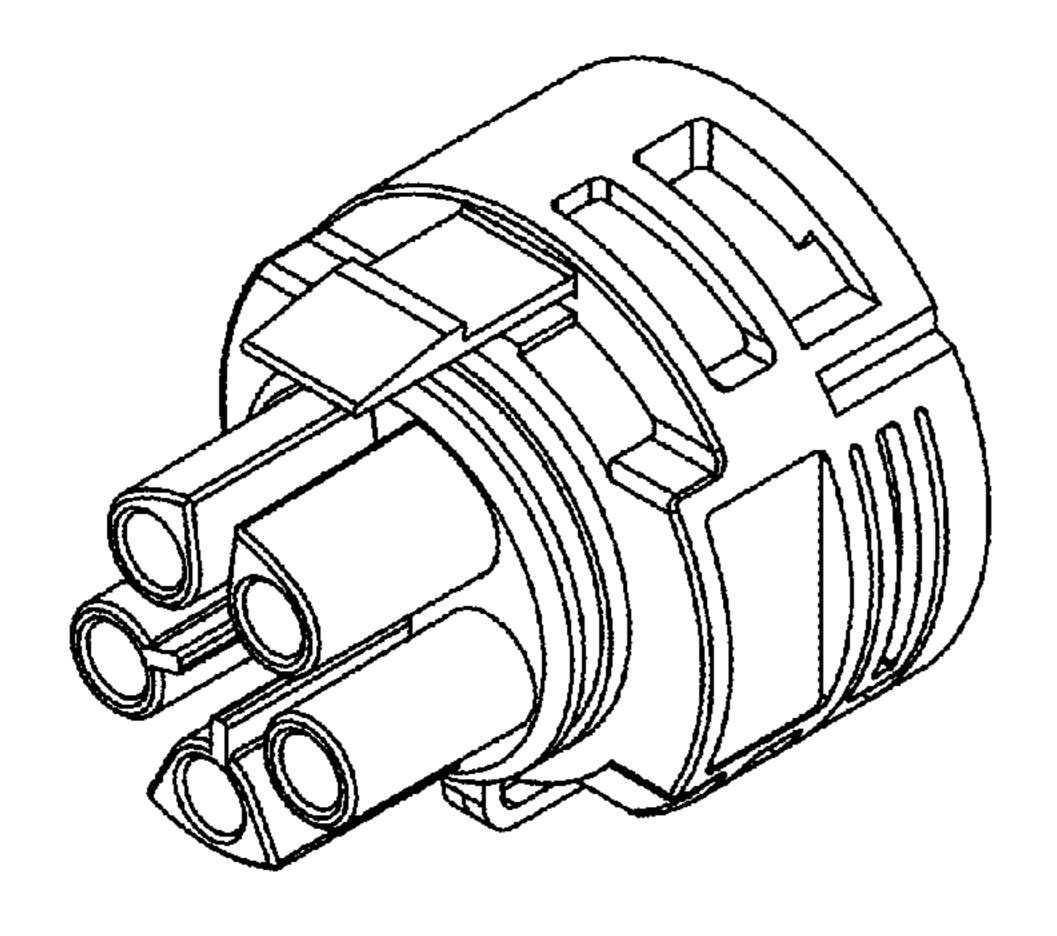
is a front perspective view of a sixth embodiment of a male power connector housing, showing my new design; FIG. 14 is a front perspective view of a seventh embodiment of a male power connector housing, showing my new design; FIG. 15 is a front perspective view of an eighth embodiment of a male power connector housing, showing my new design; FIG. 16 is a front perspective view of a pinth embodiment of
